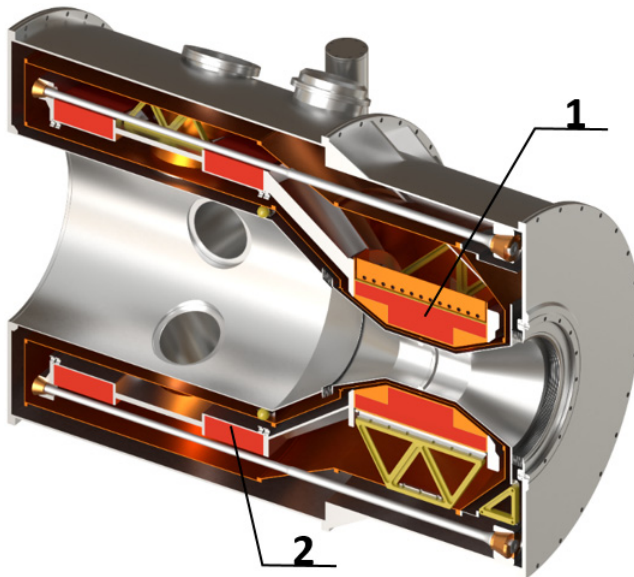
Three-dimensional model of the magnetic plug assembly: 1 – mirror coils (HTSC tape); 2 – transfer coils (HTSC current-carrying element).
